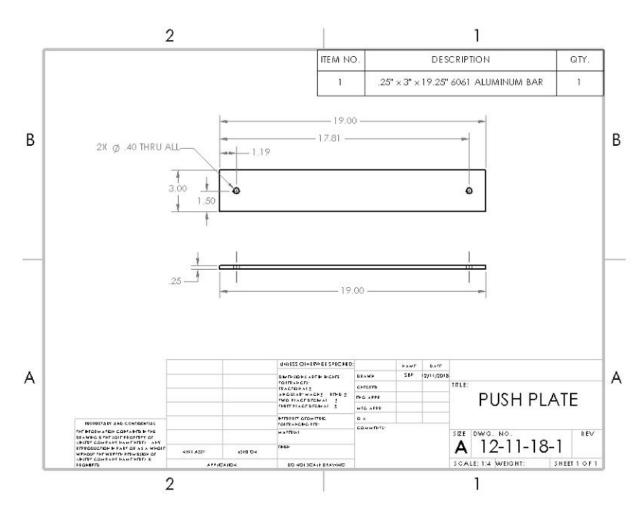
Detailed drawing of the Push Plate (part 12-11-18-1).
